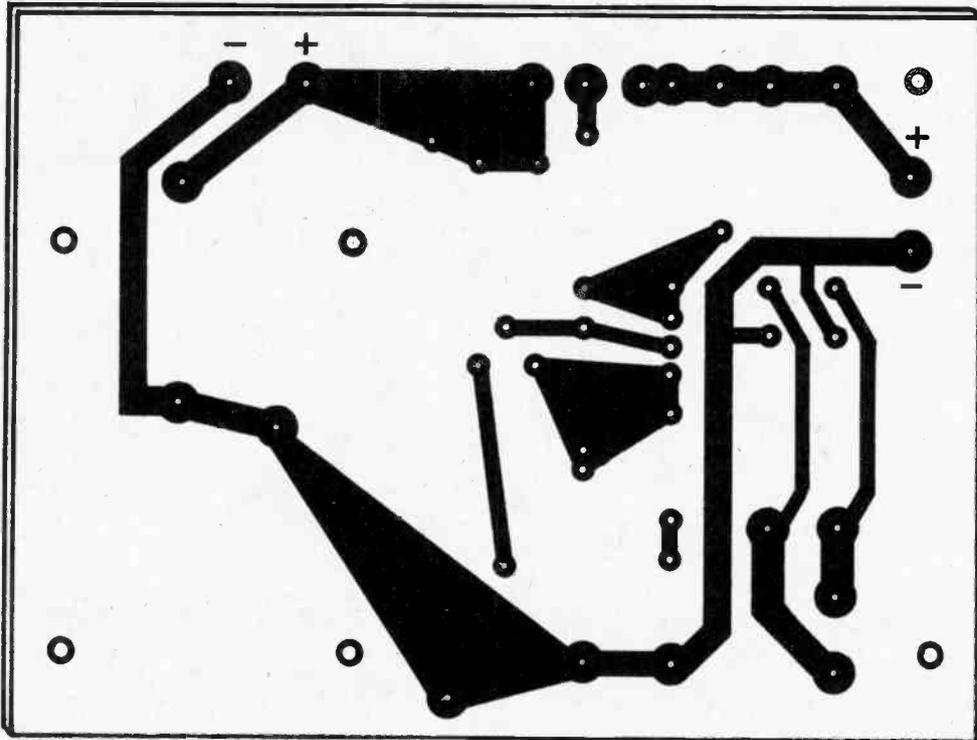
Etching and drilling details for p.s.u. printed circuit board (full size)
